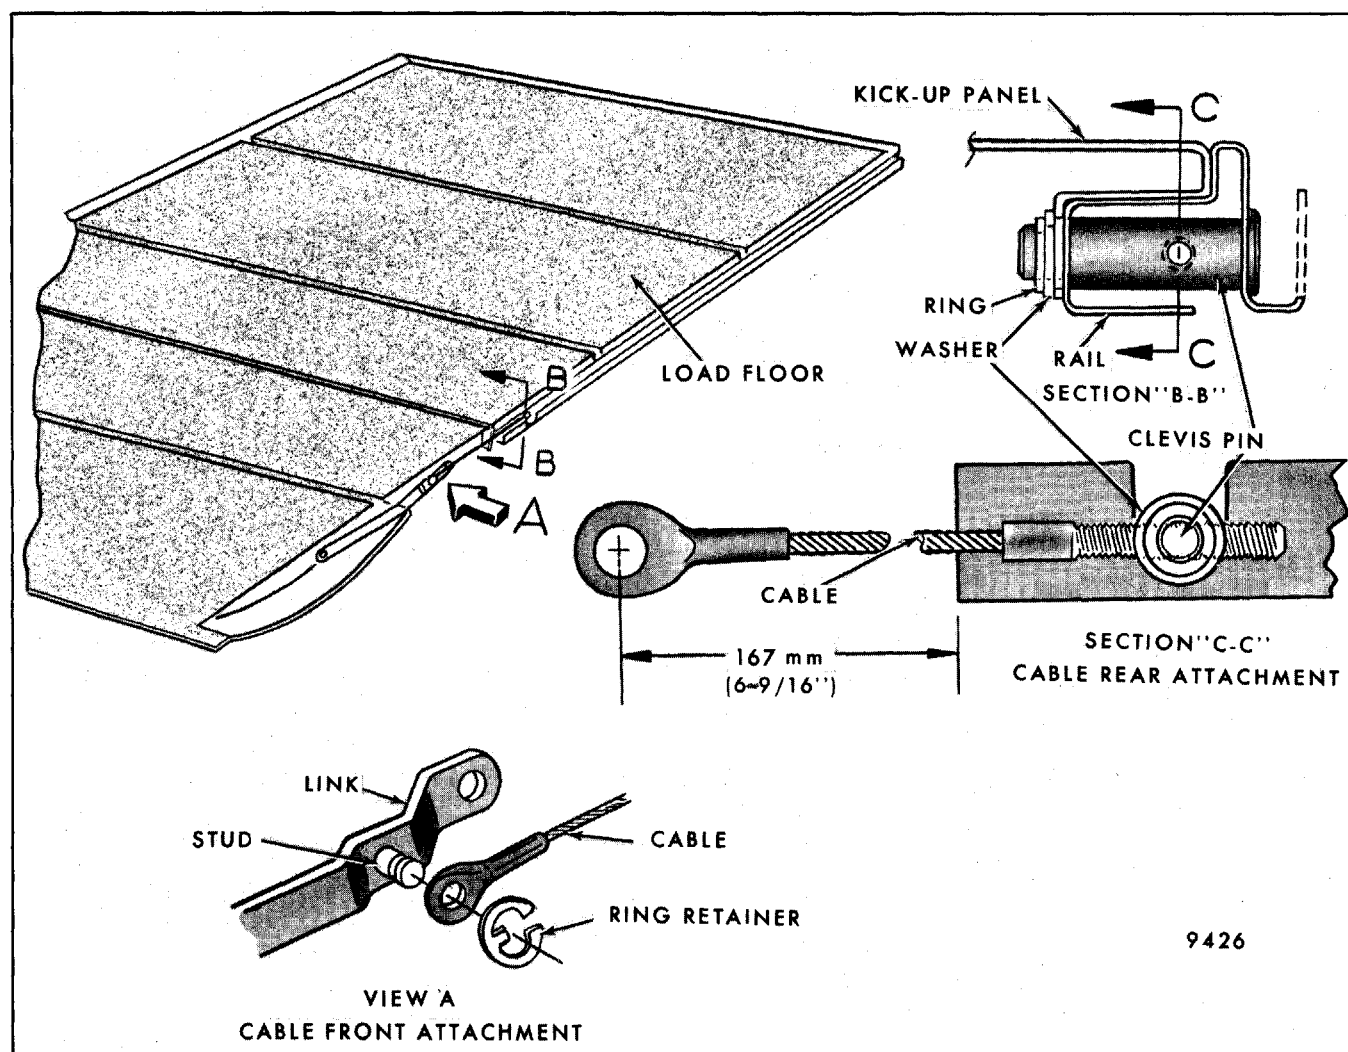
Folding Second Seat and Load Floor Cable Installation
